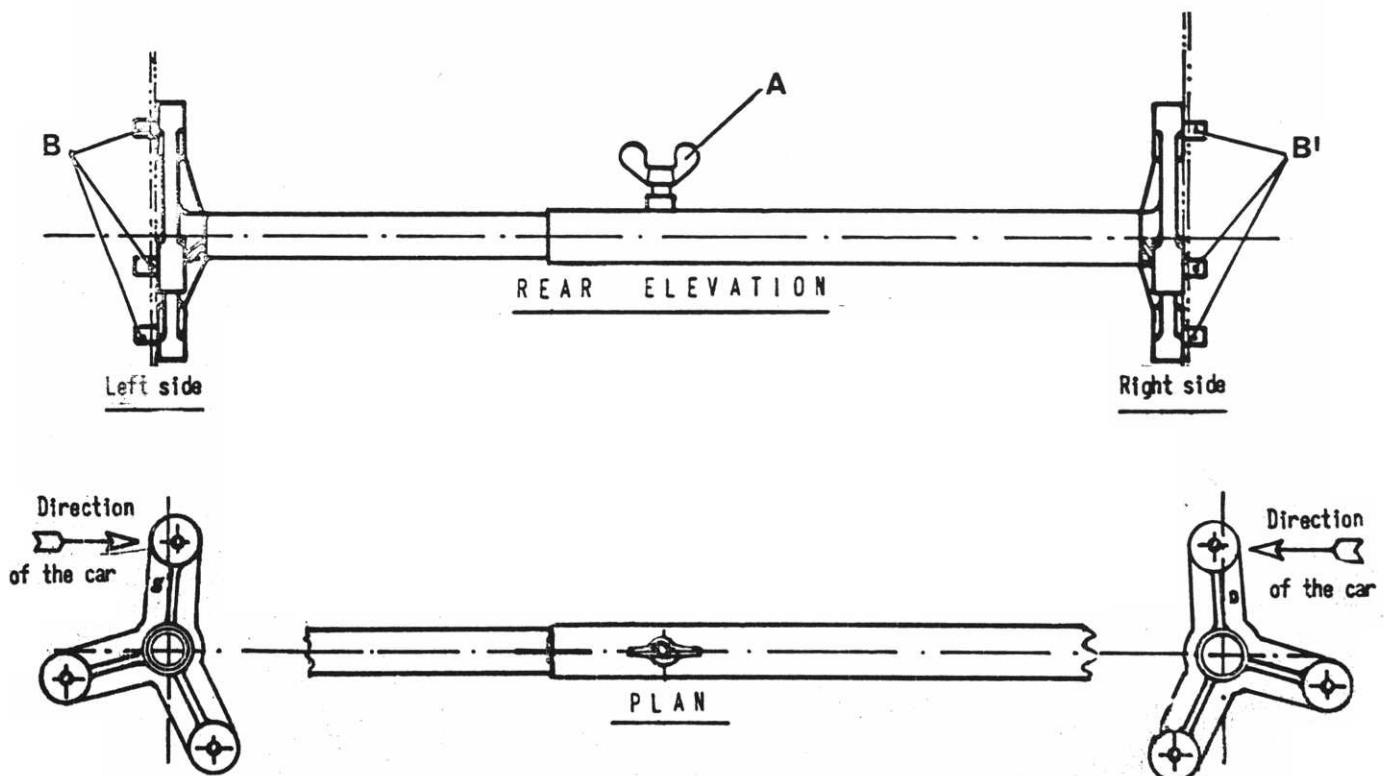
CHECKING ALIGNMENT OF THE STEERING BOX AND IDLER
